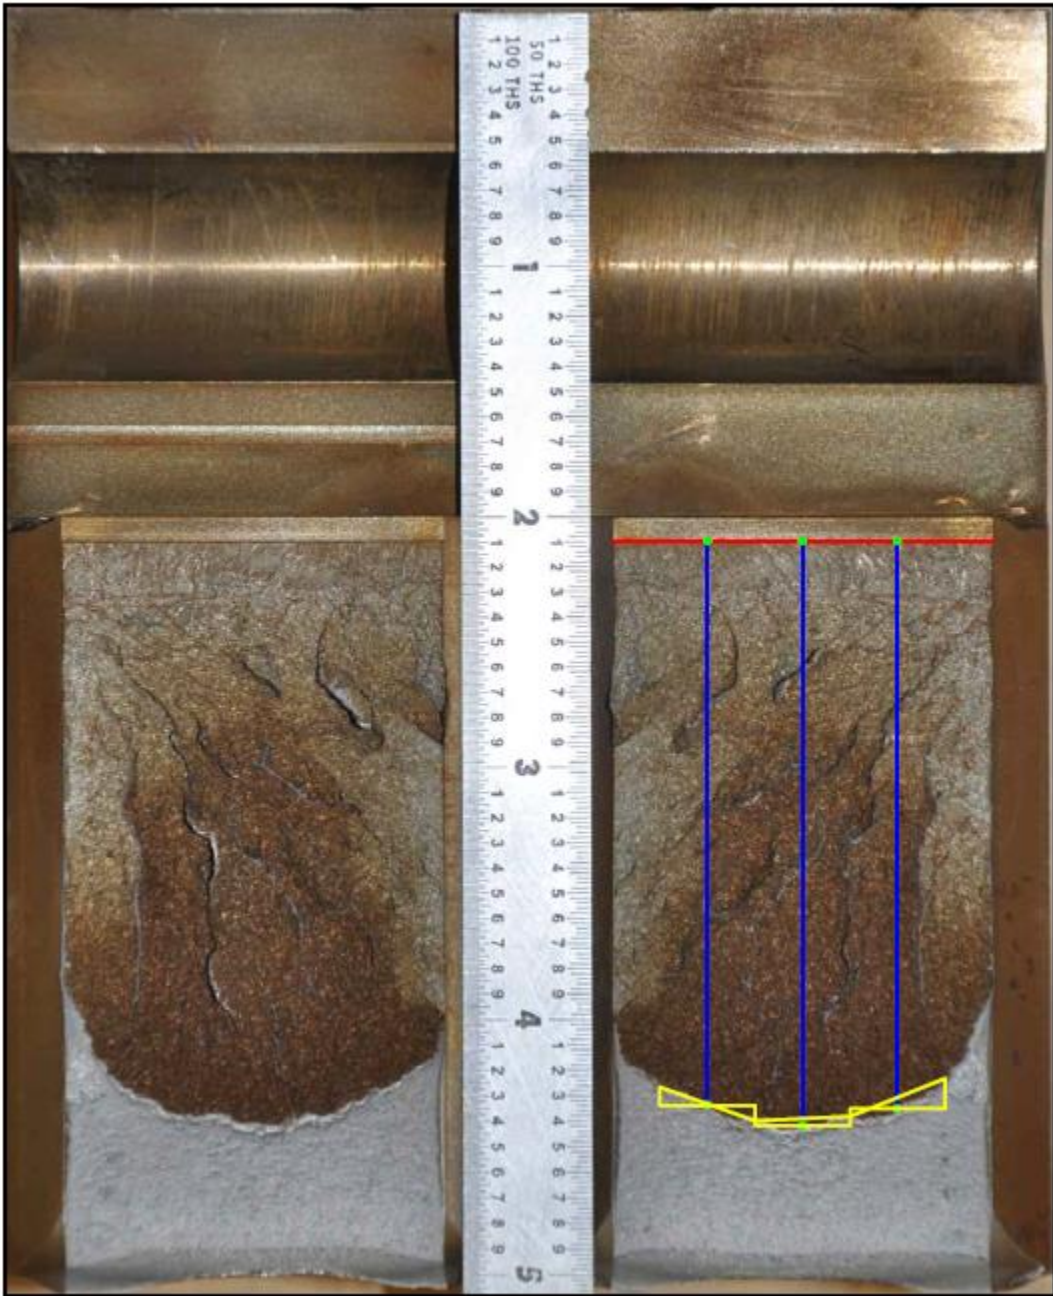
Specimen D16a Fracture Surface
